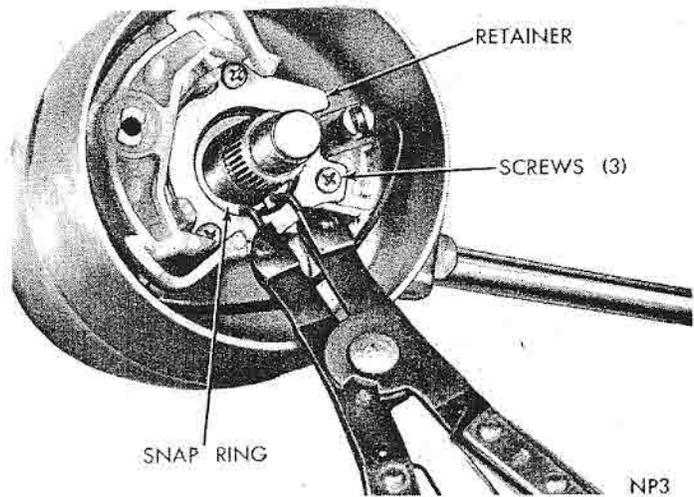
Removing or Installing Steering Shaft Snap Ring
